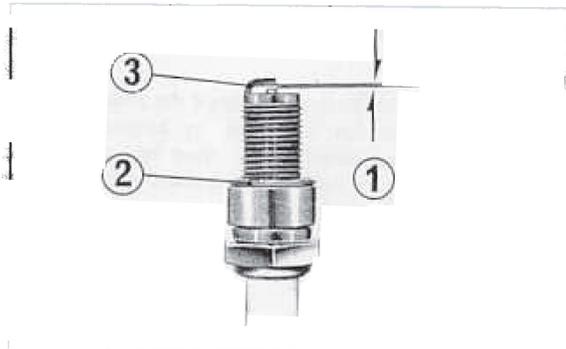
(1) Spark plug gap (2) Gasket (3) Side electrode
